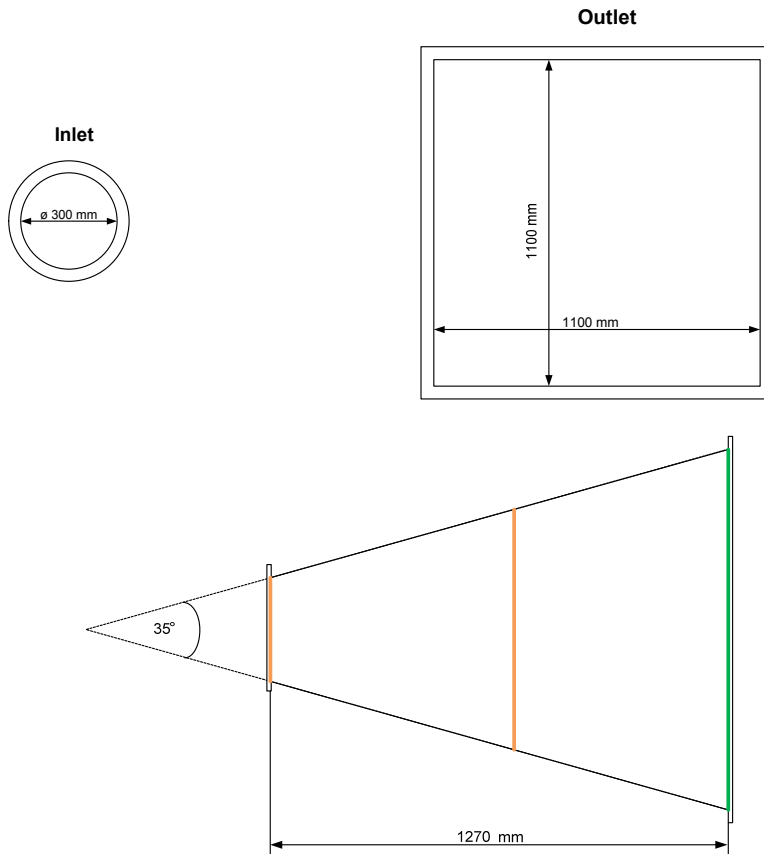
Diffuser dimensions. Top left: diffuser inlet; top right: diffuser outlet; bottom: diffuser view from the side (the positions of the screens are marked in orange and the position of the perforated plate is marked in green)
